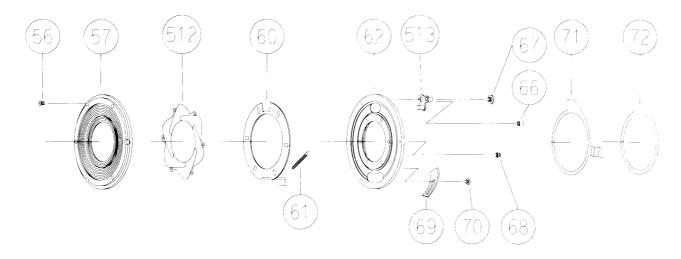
Nikon Diaphragm Housing Assembly (Ref. 504)
